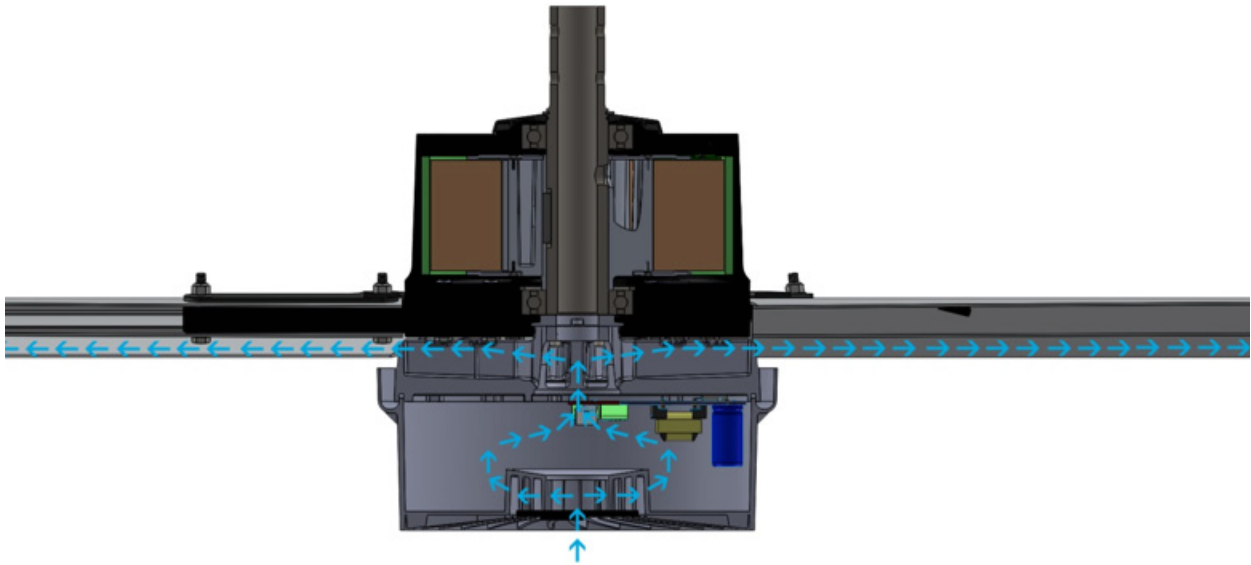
, Drawing of the air flow across the heat sink and through the blade.
